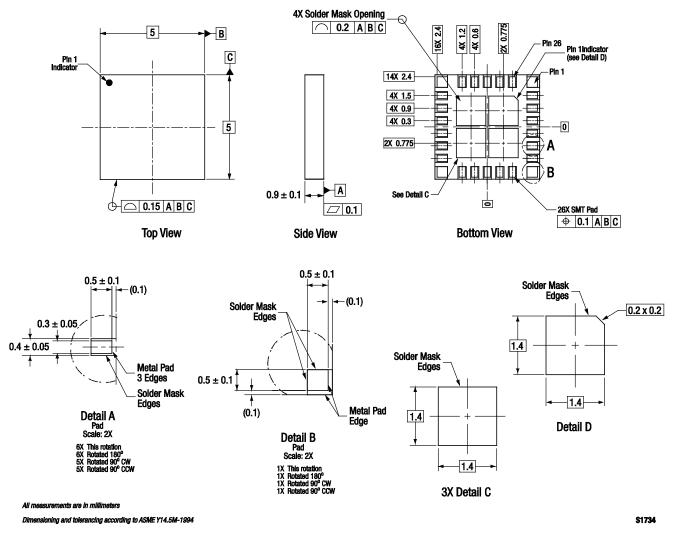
SKY65346-11 26-Pin MCM Package Dimensions
